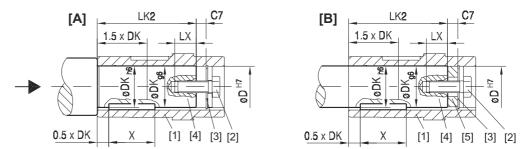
Customer shaft with contact shoulder (A) and without contact shoulder (B)
